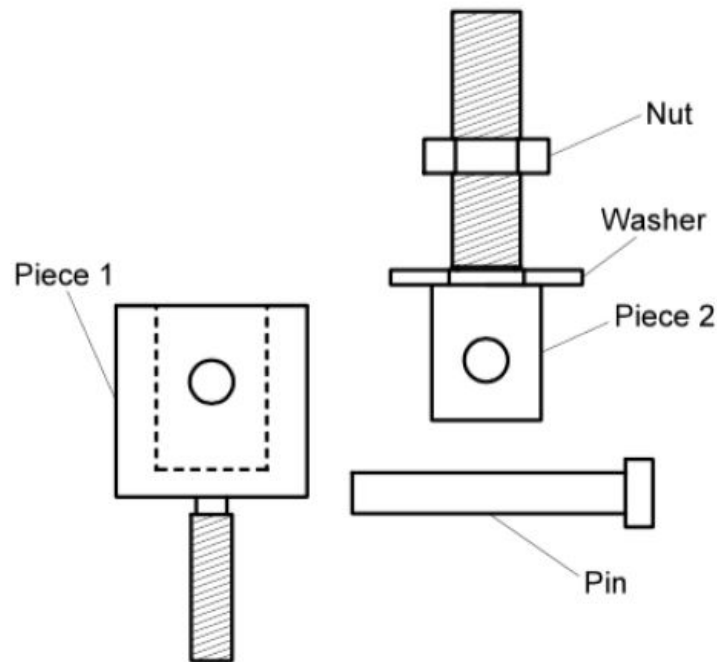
DST Coupling Attachment Details (Khajeh-Hosseini, 2015)
